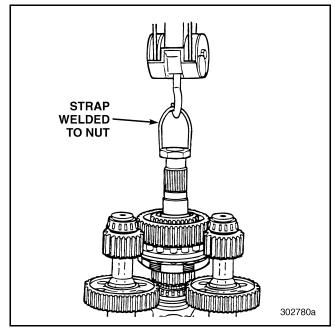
Removing Mainshaft and Synchronizer Assembly (T313L21/T318L21 Shown)
